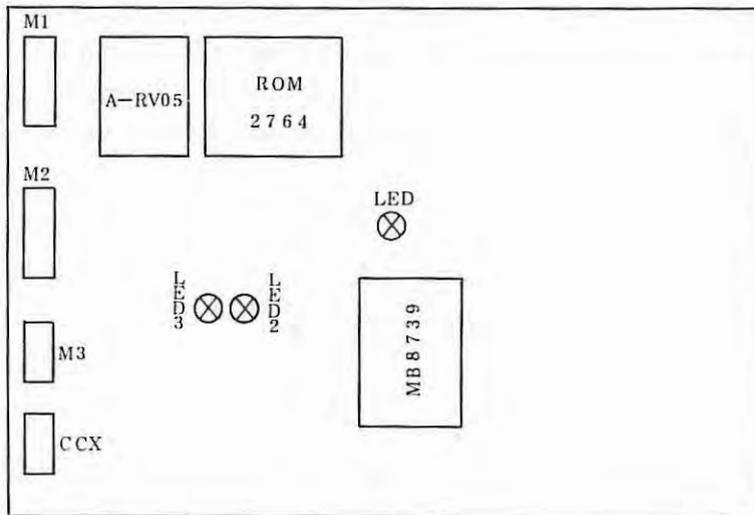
(a) Mounting Positions of Alarm Lamps on Master PCB (A16B-1000-0010)
